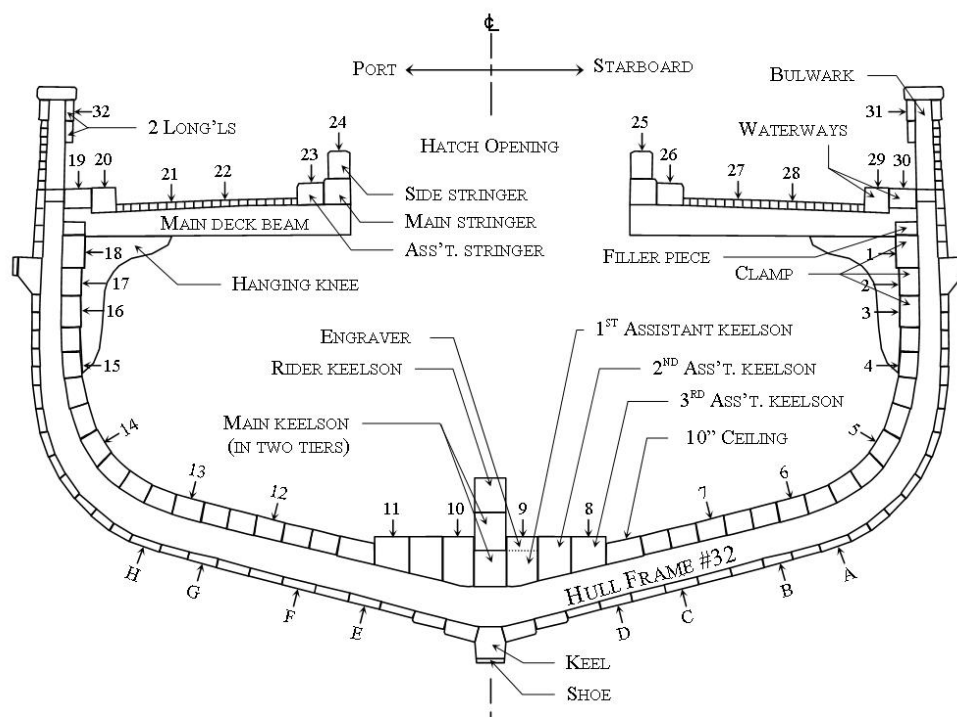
Schematic of drilling locations for the cross-section at frame 32.
